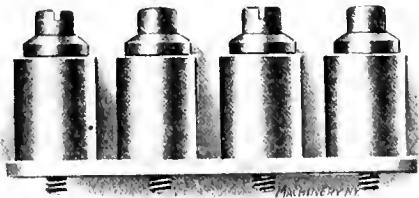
Tool-makers' Buttons with Screw and Washers for Jig Work
